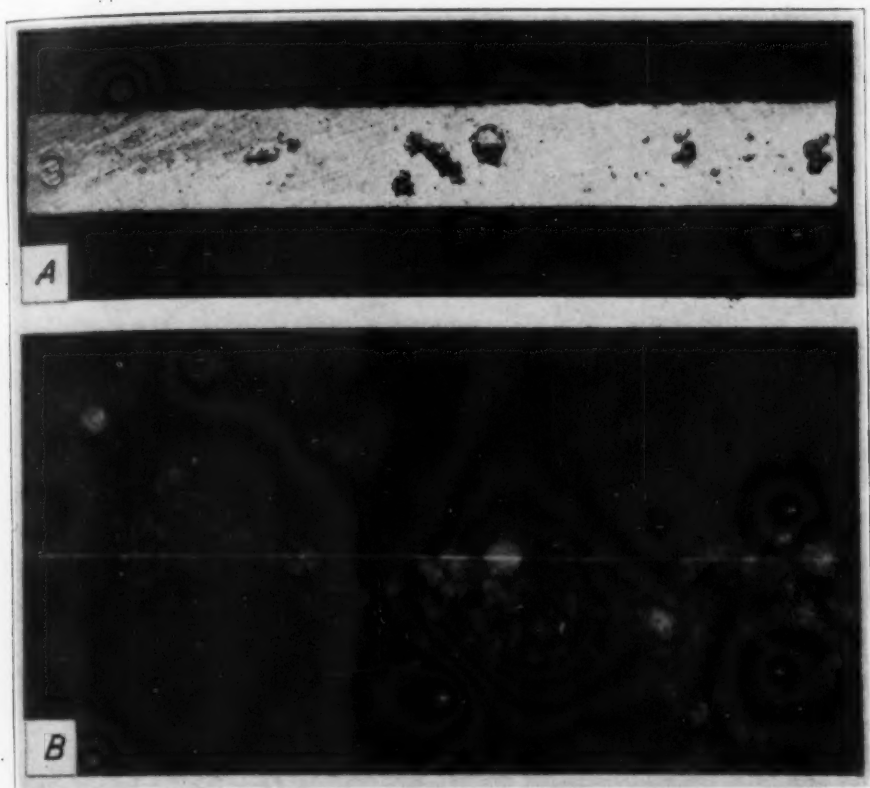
Blowholes and Pinhole Porosity in Aluminum Alloy Sand Casting. 9A is Section of Casting Cut Along White Line of 9B. 9B is Radiograph.
